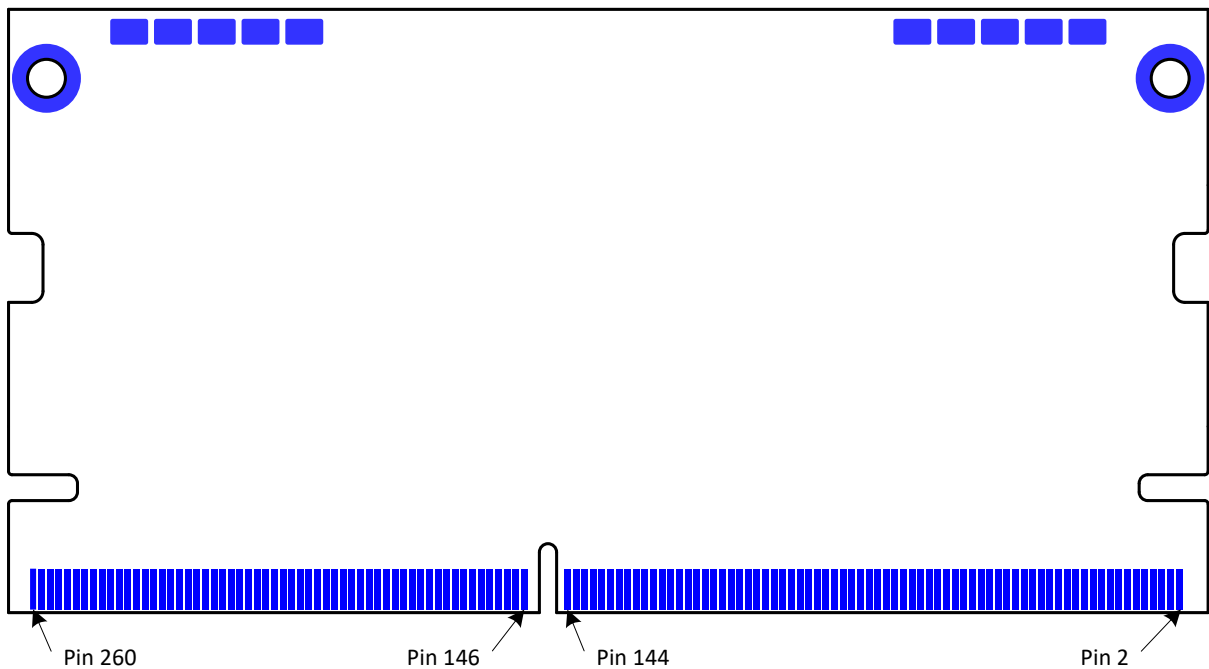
Pin numbering schema on the bottom side of the module (bottom view)
